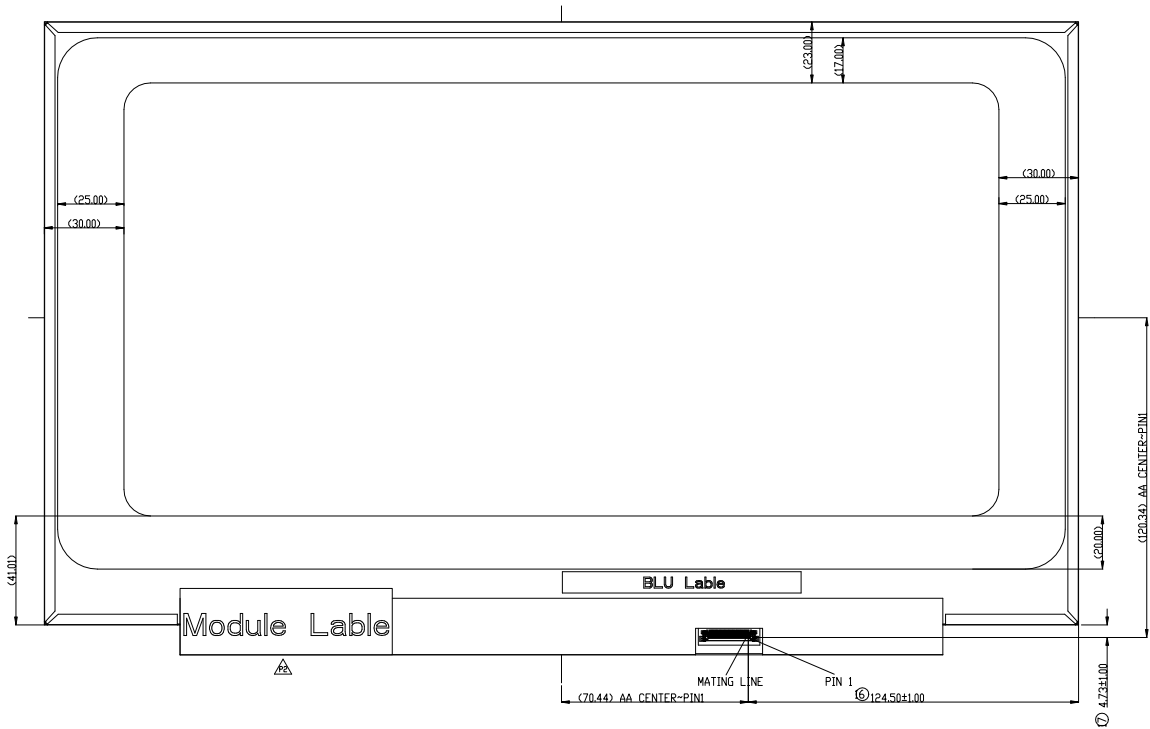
TFT-LCD Module Outline Dimensions (Rear view)
